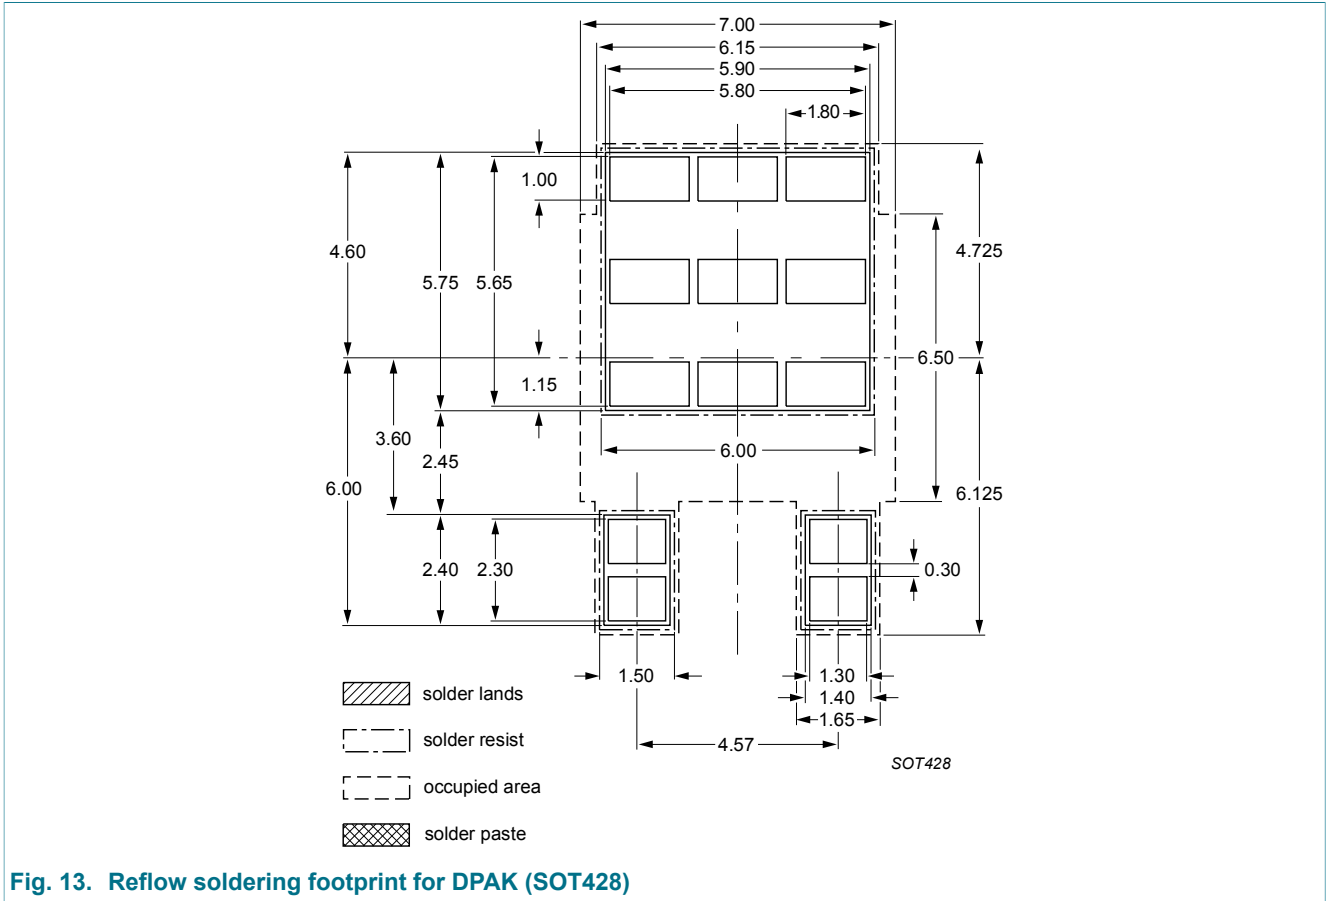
Reflow soldering footprint for DPAK (SOT428)
